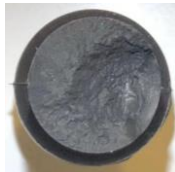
Fracture surface of unaged rubber sample of fatigue test
